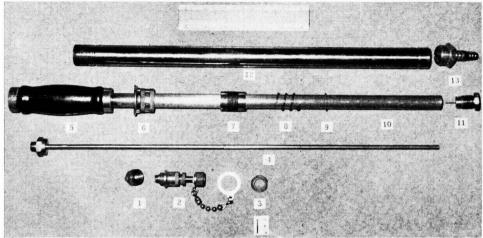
Unit "E" hand pump. (1) Nozzle cap. (2) Adjustable-stream nozzle, chain attached to free-turning rings, (3) Leather washer, (4) Inner tube, (5) Hand grip, (6) Packing nut, (7) Cord packing bounded by brass sleeves. (8) Shock absorber spring, (9) Brass washer, (10) Plunger, (11) Outlet valve assembly, (12) Cylinder, (13) Inlet valve assembly and hose nipple.
